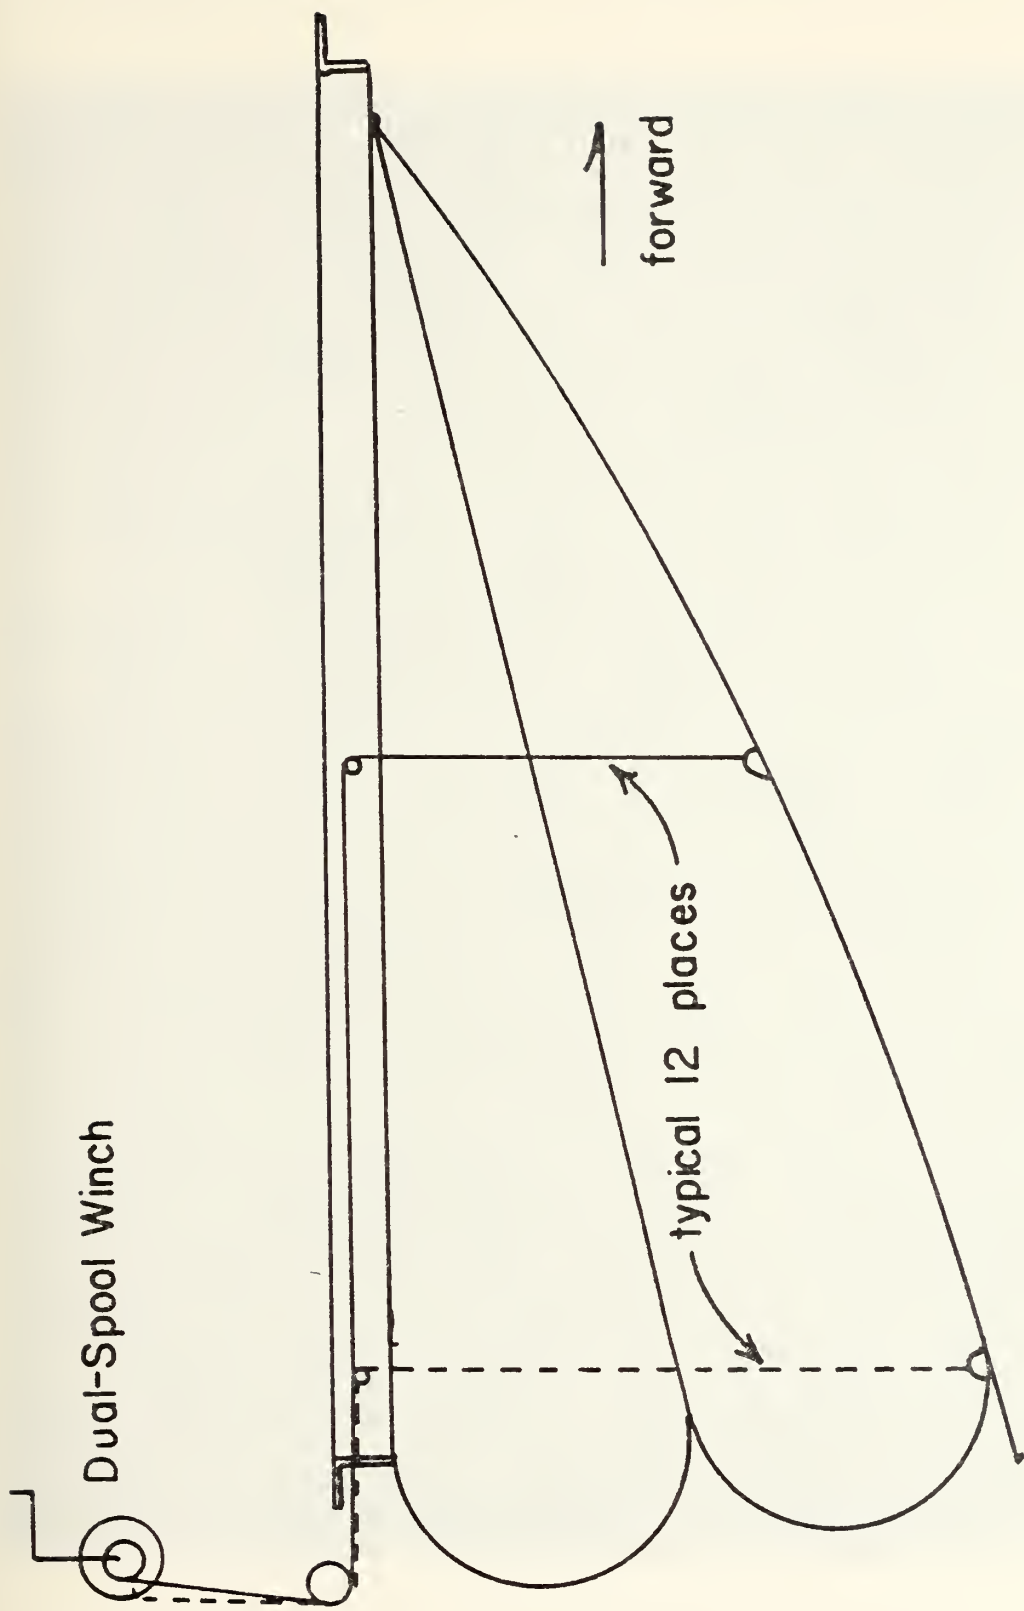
STERN SEAL-SHOWING RIGGING OF POSITION CONTROL
